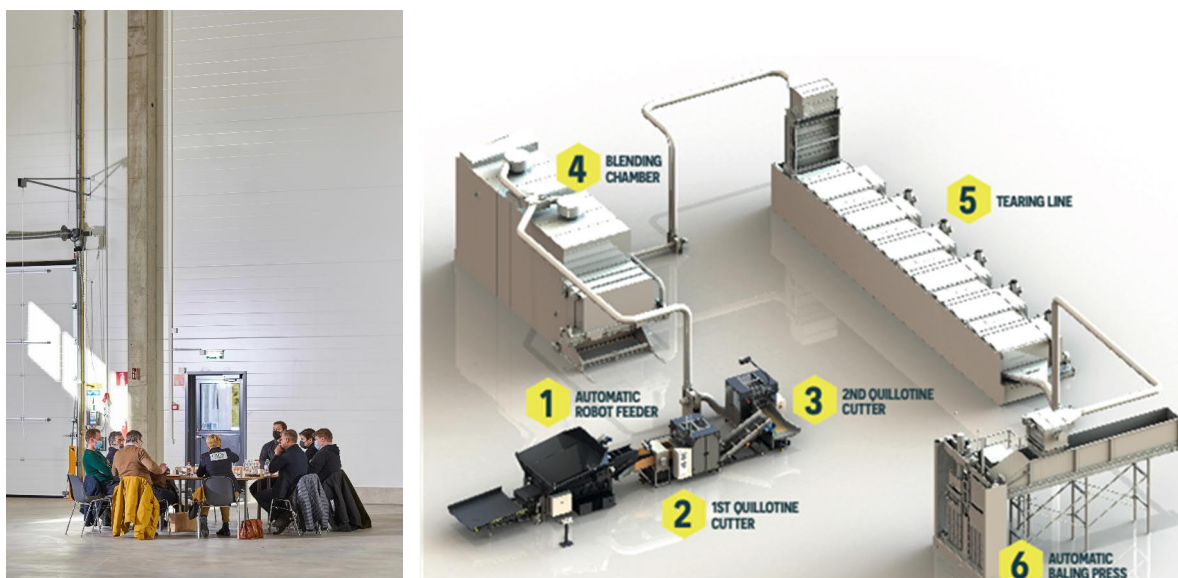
Rester site in Paimio: consignment meeting of the plant and Laroche machinery to be installed
